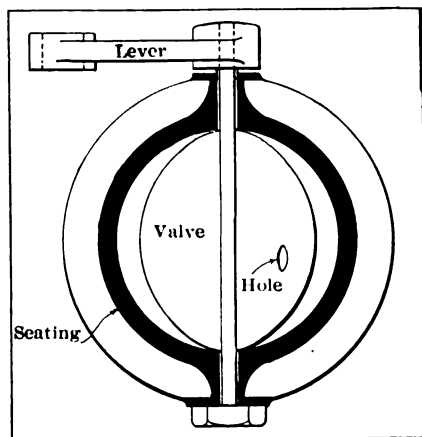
Butterfly throttle valve with hole cut in valve to permit of slow running
